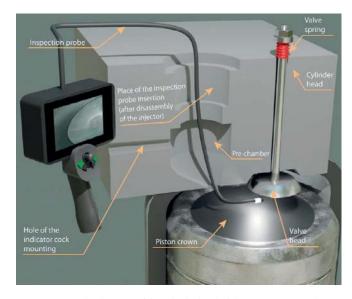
Longitudinal section of the cylinder head of the Farymann Diesel D10 engine with the marked place of entering the video endoscope inspection probe
